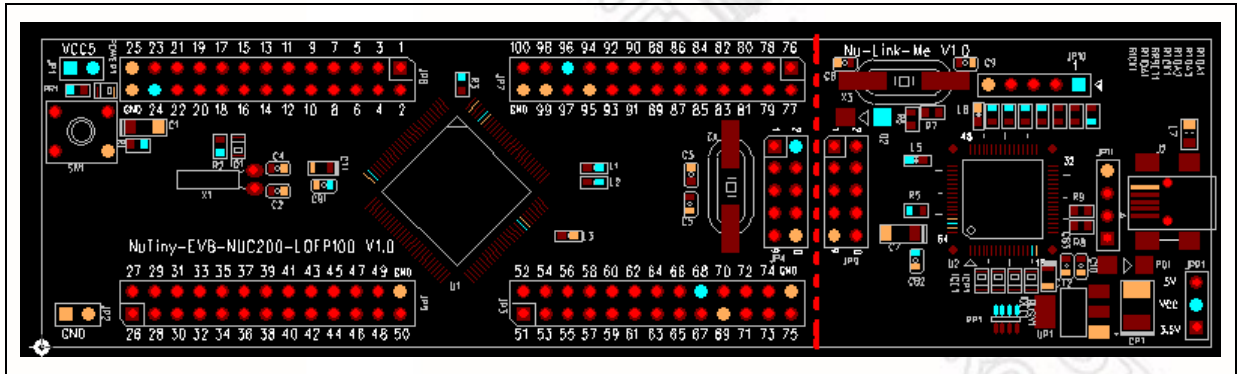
NuTiny-SDK-NUC200 PCB Placement
